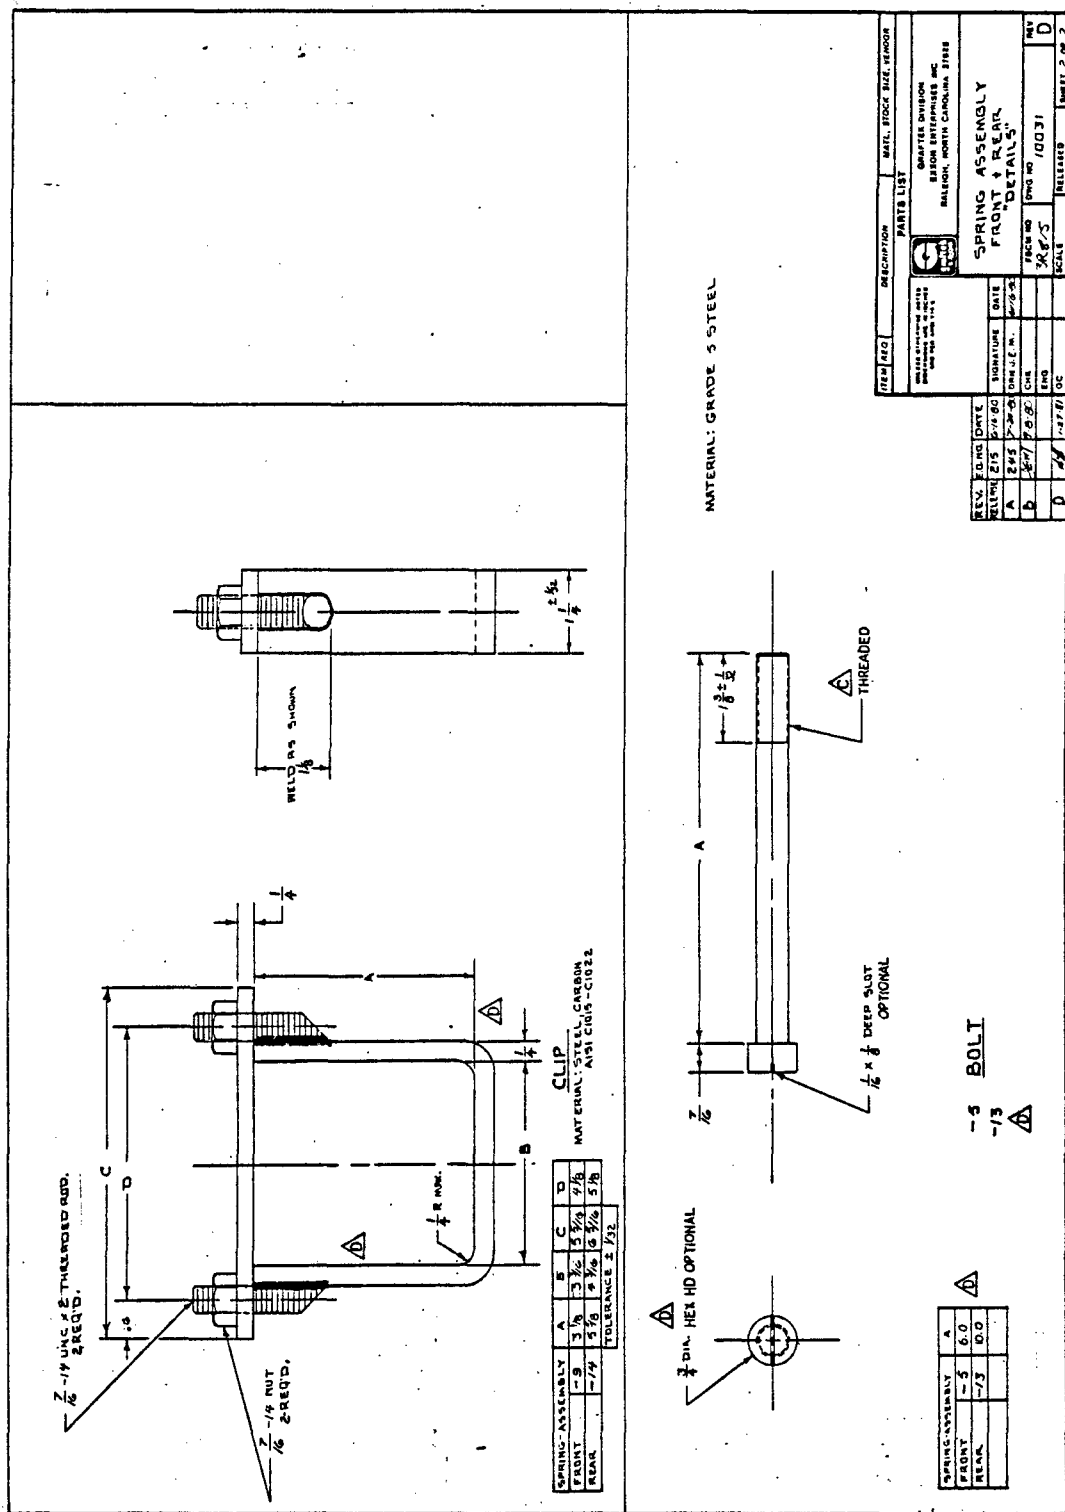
and 9 show the final composite designs for the rear and front leaf spring assemblies. These designs were used for the prototype fabrication program.
